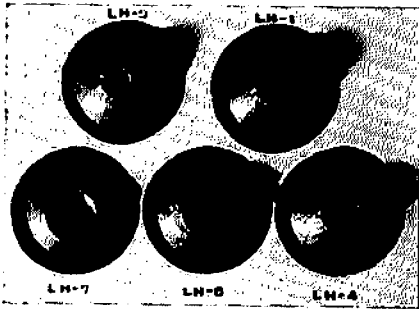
Deformed figures of lead circular plates with a center hole by the pass through method
